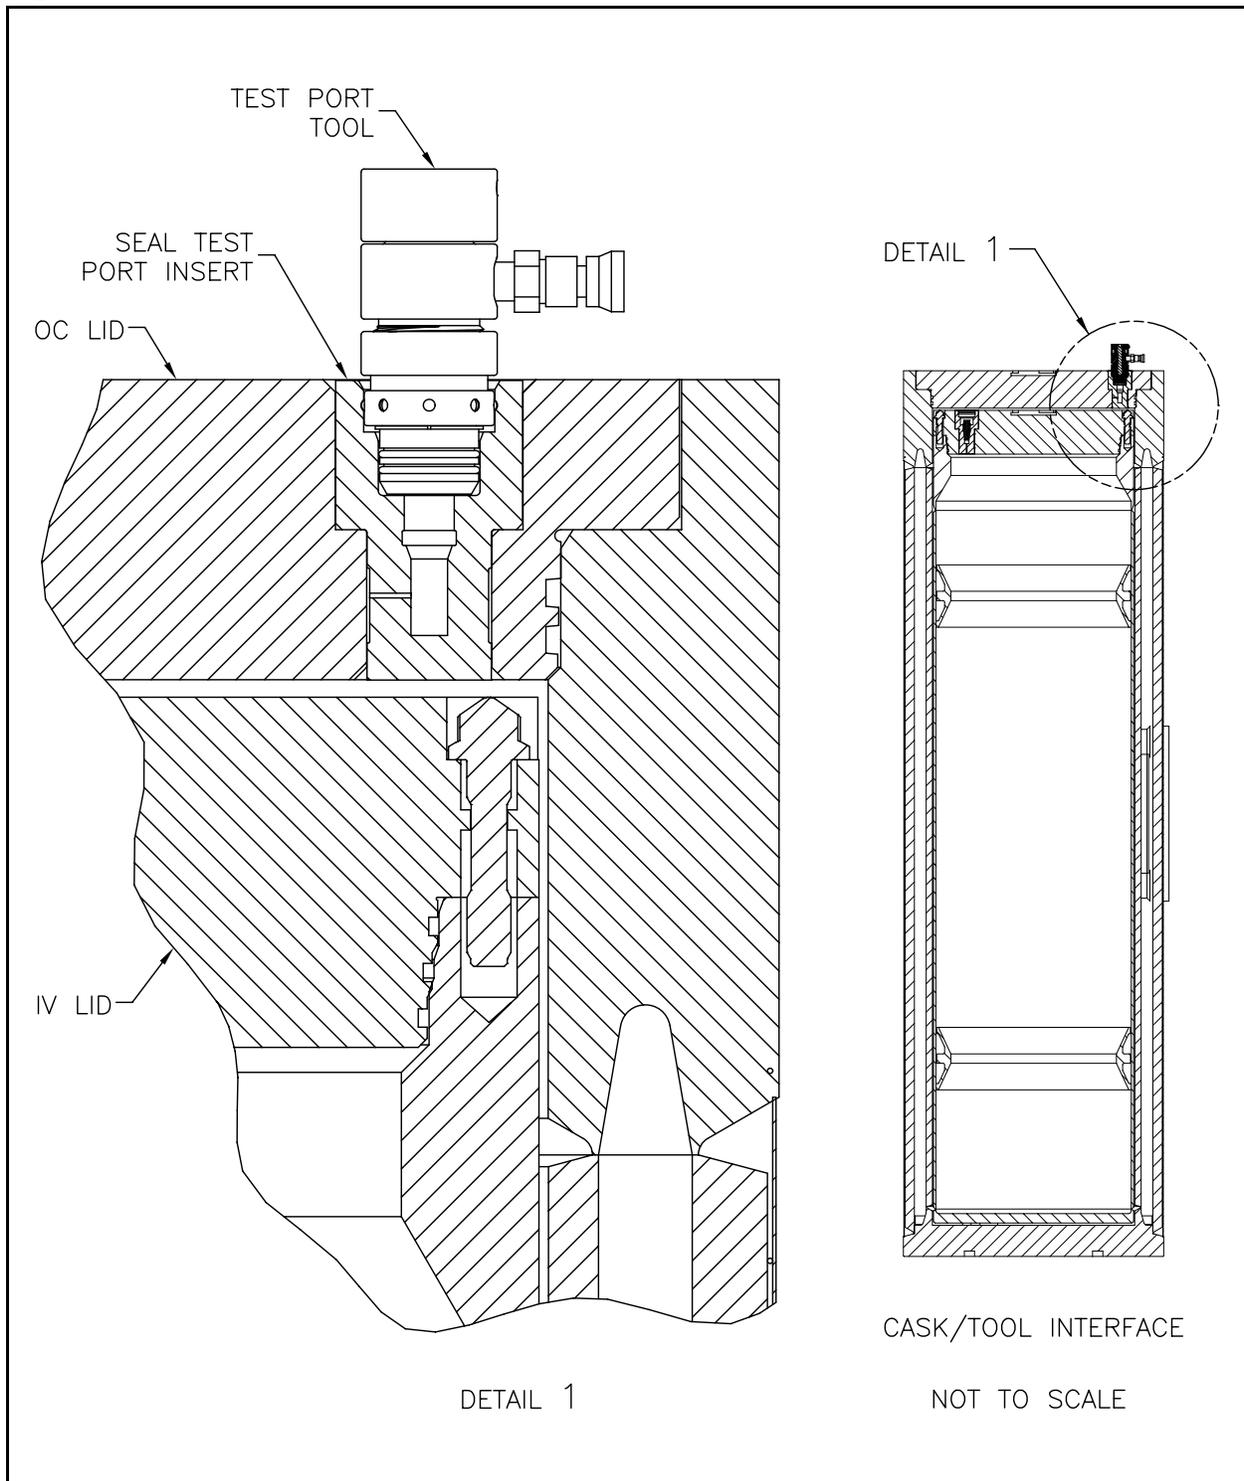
Test Port Tool (164-F-001) - (P/N 2078-500-01)
